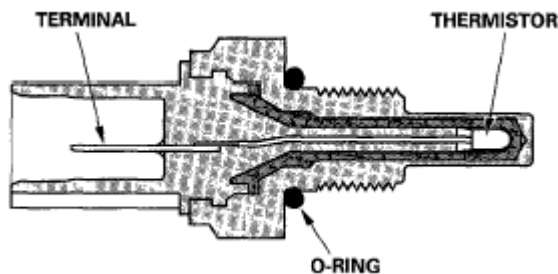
Identifying Terminal And O-Ring Of Engine Coolant Temperature Sensors
